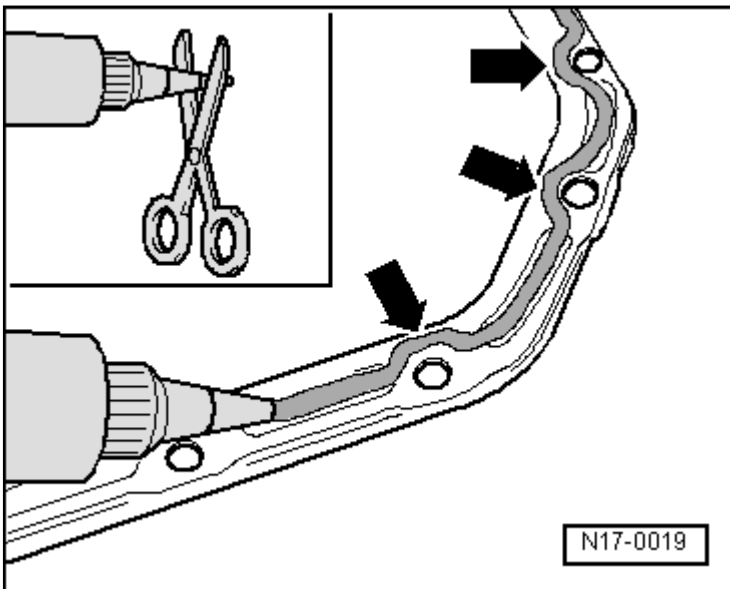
Cutting Off Tube Nozzle & Applying Silicone Sealing Compound To Oil Pan Sealing Surface
